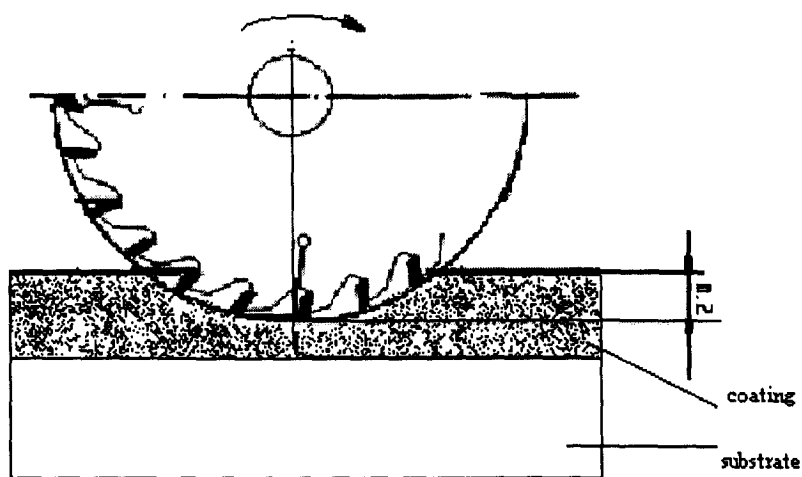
Sketch of rotating slot cutter and coated panel [mm]
